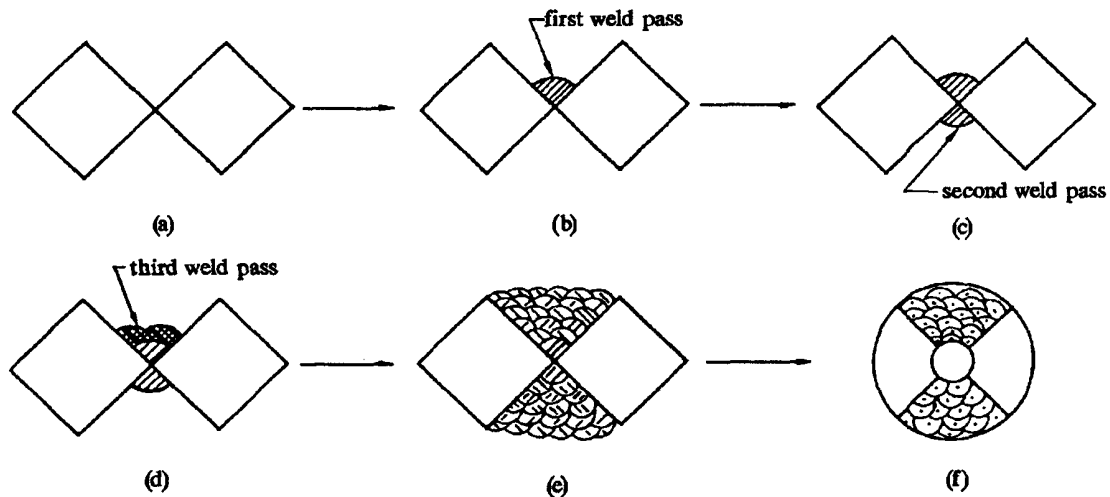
Construction of welded test samples (cross section): (a) starting base metal bars, (b) first welding pass, (c) second welding pass, (d) third welding pass, (e) finished weld, (f) final test sample.
